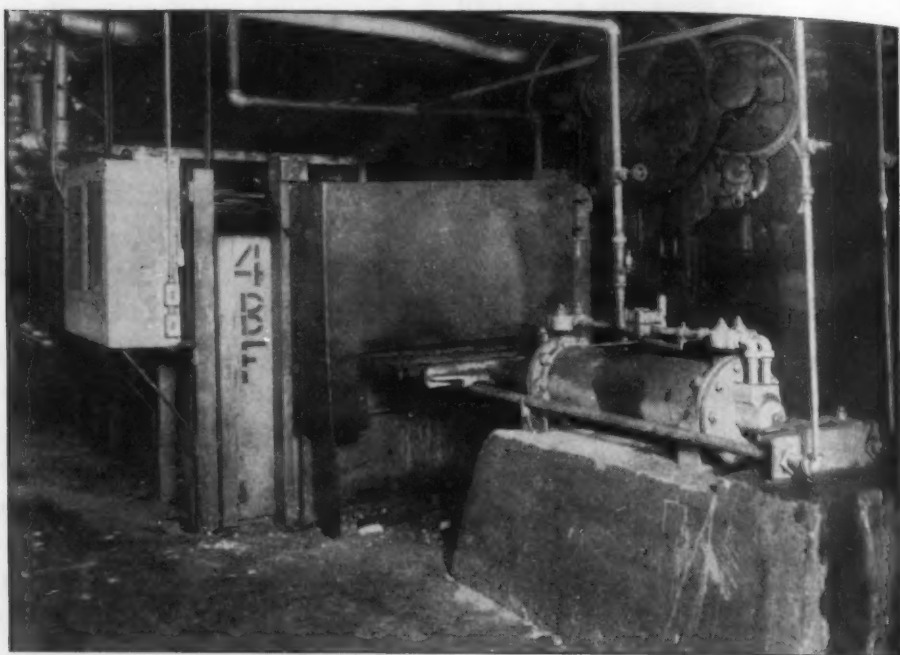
Charging End—Continuous Crank Shaft Forging Furnace.
